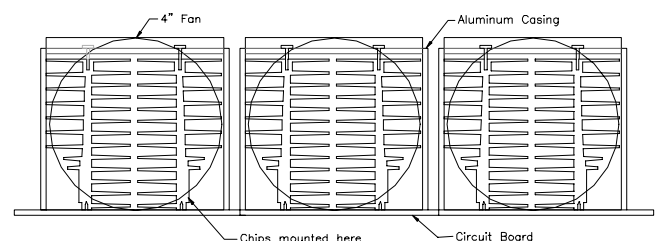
Final heatsink design using six extruded aluminum elements and three 4-inch computer fans.
